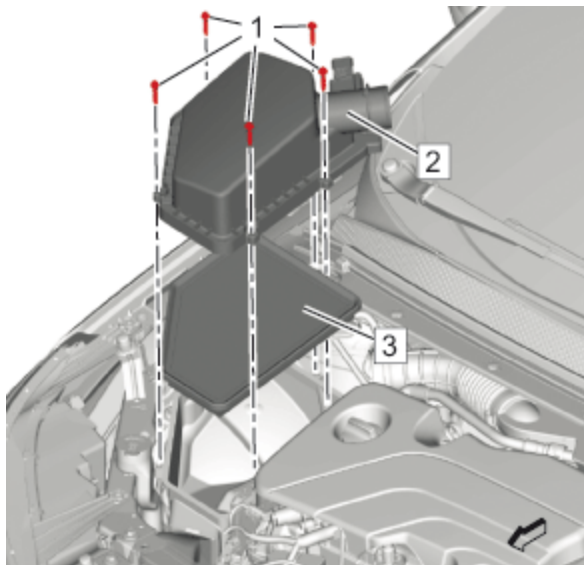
Air Cleaner Upper Housing, Air Cleaner Element And Bolt
